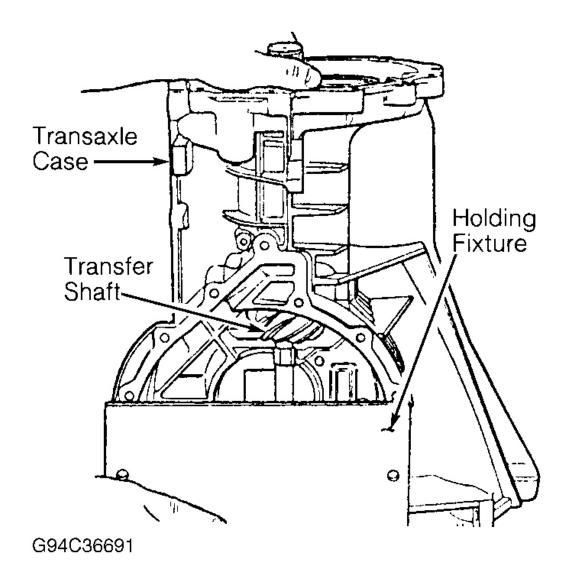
Transaxle Case & Transfer Shaft On Holding Fixture Courtesy of CHRYSLER LLC
